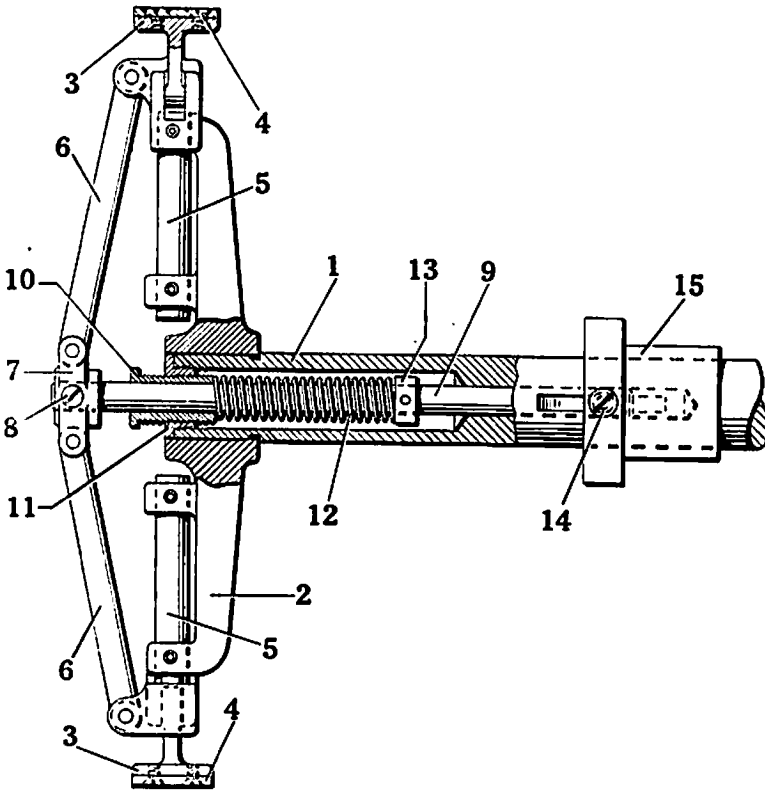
Driving Shaft Friction Clutch. The driving shaft 1 and the friction clutch arm 2 are shown partly in section to indicate the parts inserted in the shaft. The clutch is engaged whenever spring 12 is permitted to move rod 9 to the right, thereby pressing friction shoe buffers 4 against the revolving driving gear pulley. Whenever flange 15 moves the clutch rod to the left, the buffers are disengaged from the driving pulley and the cams are stopped.
